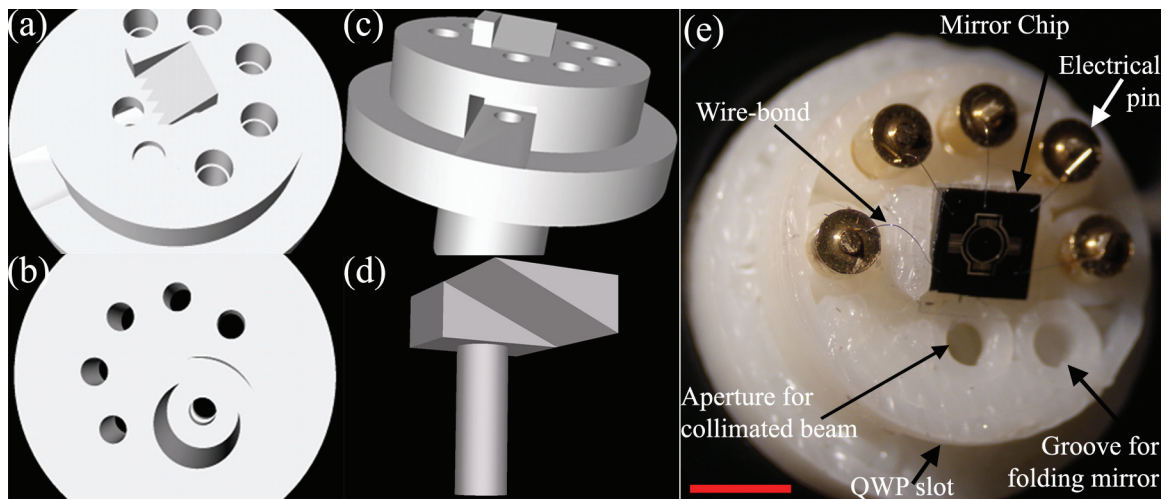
Illustrations of the design of the MEMS mounting package incorporated into the handheld confocal imaging instrument. (a-d) Mechanical drawings of the MEMS mount. (a) Top view. (b) Bottom view. (c) Oblique view. (d) Folding mirror (separate piece). (e) Photograph of the fabricated mount with a micromirror scanner packaged in it.
